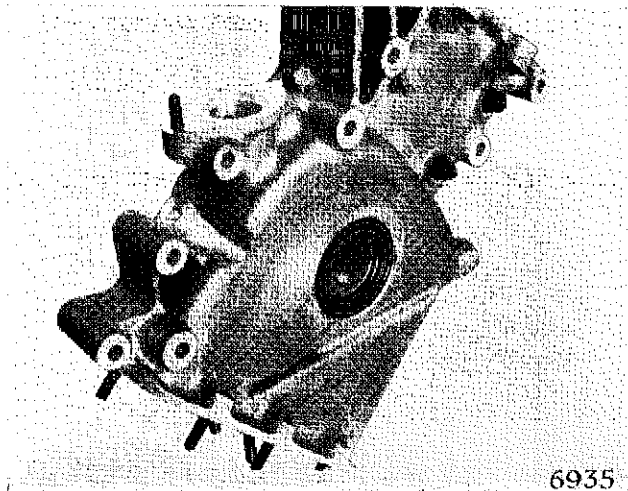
Timing cover with crankshaft pulley oil seal correctly fitted
